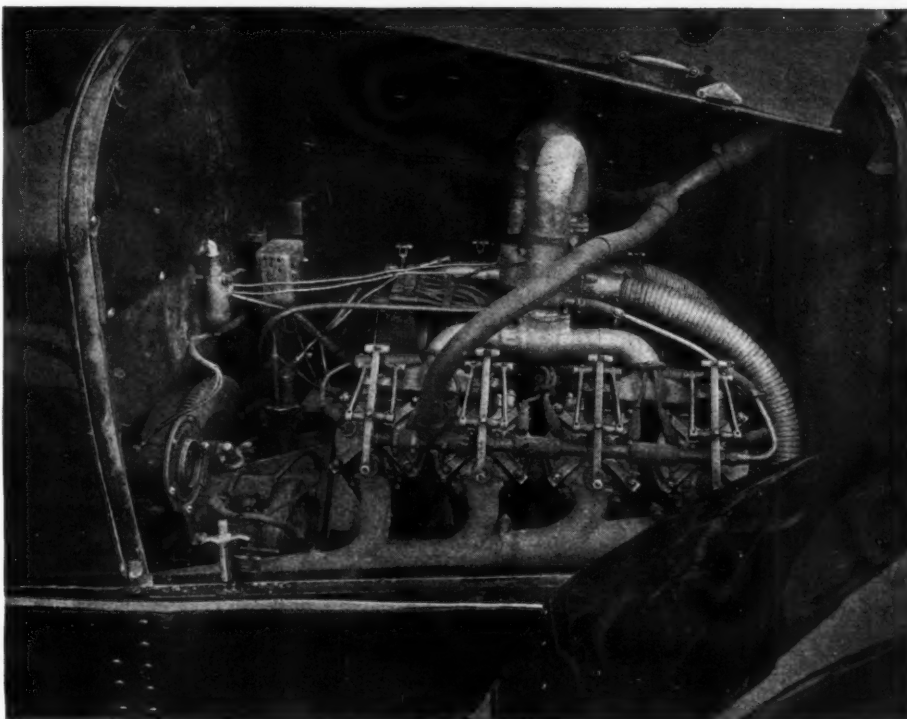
Marmon installation. The change in inlet manifolding permits of installation of the generator in the Vee between cylinder blocks. Starter is mounted at right rear of engine
